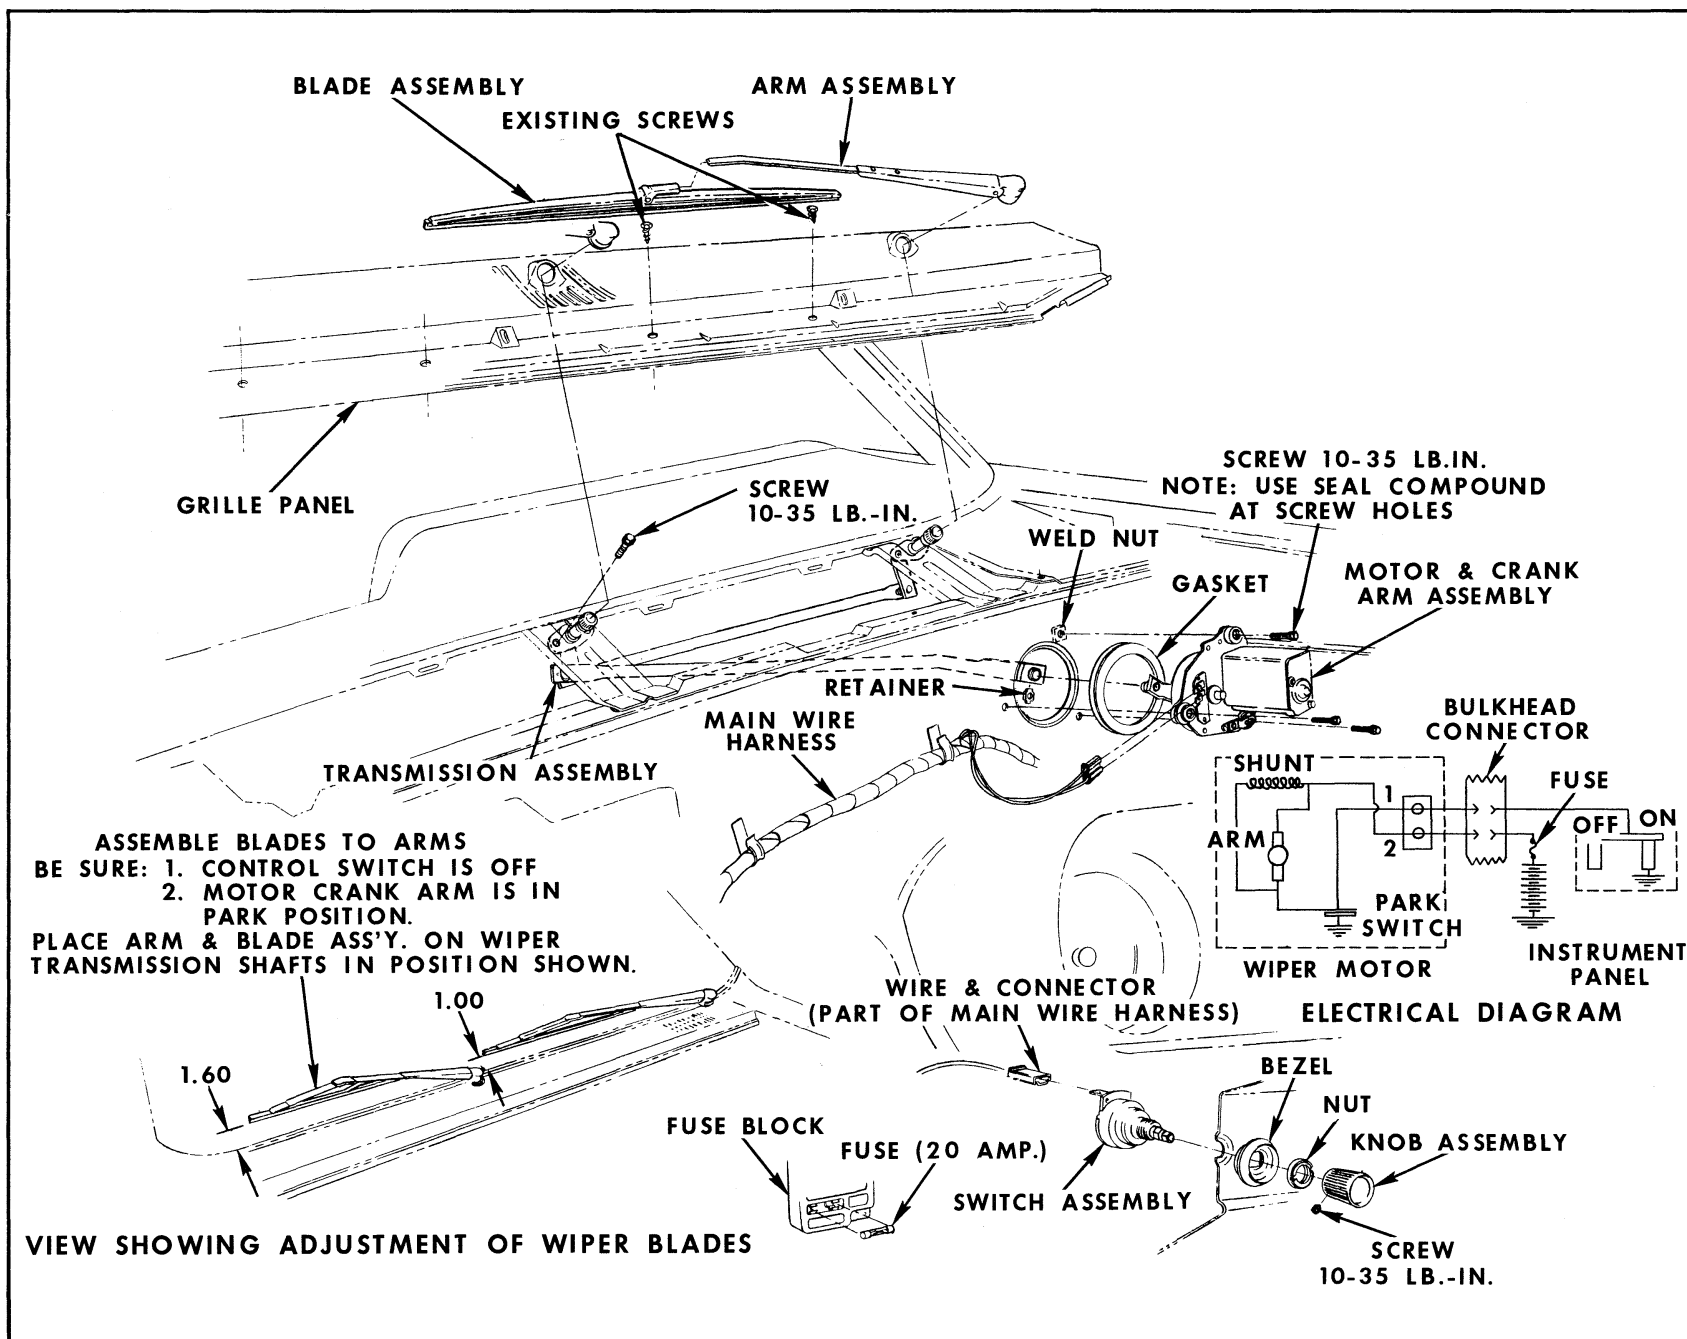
Windshield Wiper (Single Speed) Installation
